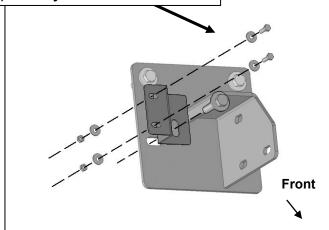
Reuse factory hardware to attach Driver/left Frame Bracket to end of frame
